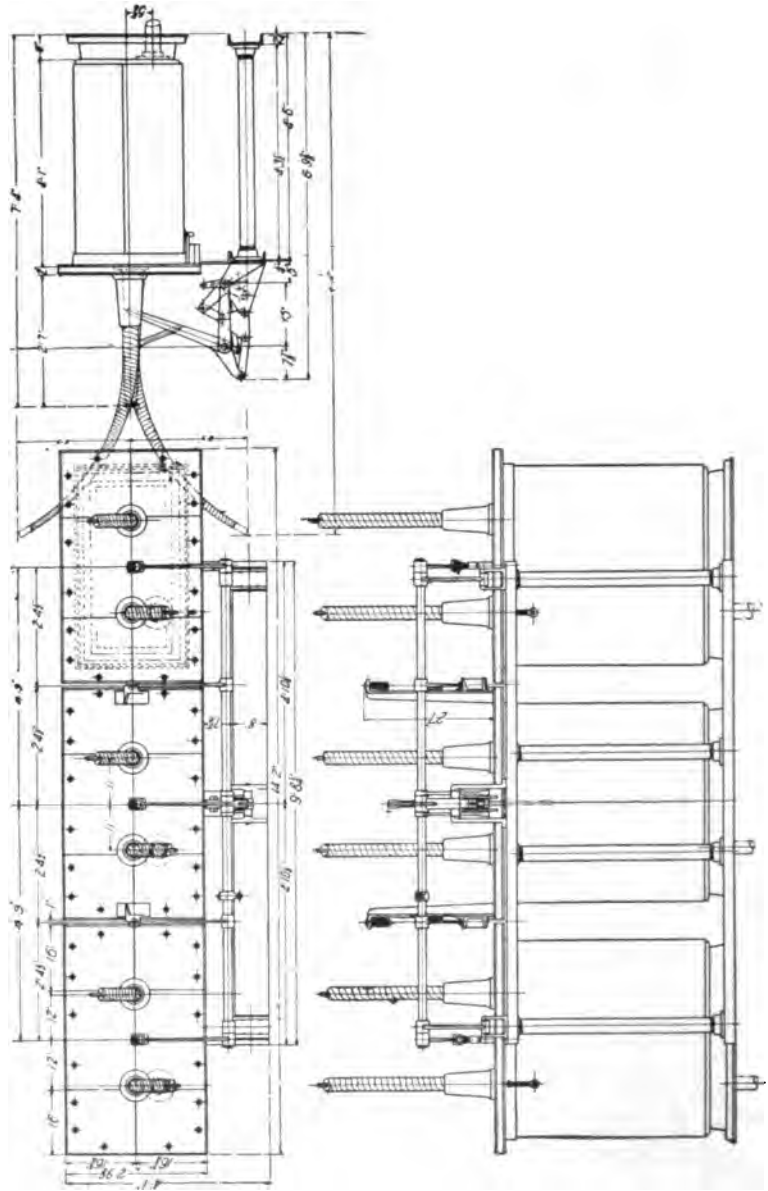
60,000-volt, top-connected breaker with boiler-iron tanks
